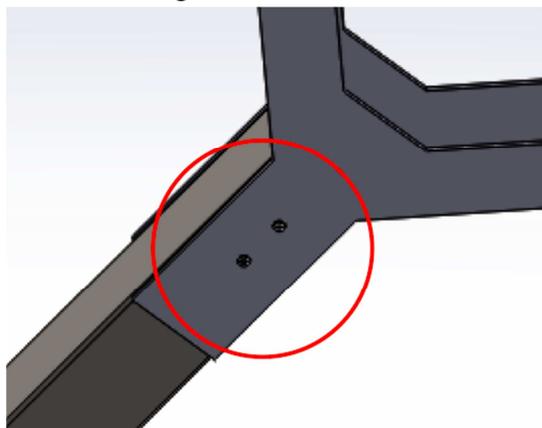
Location of the base of the mounting assembly where hex bolts and nuts will be used to secure the mounting assembly onto the steel posts.
